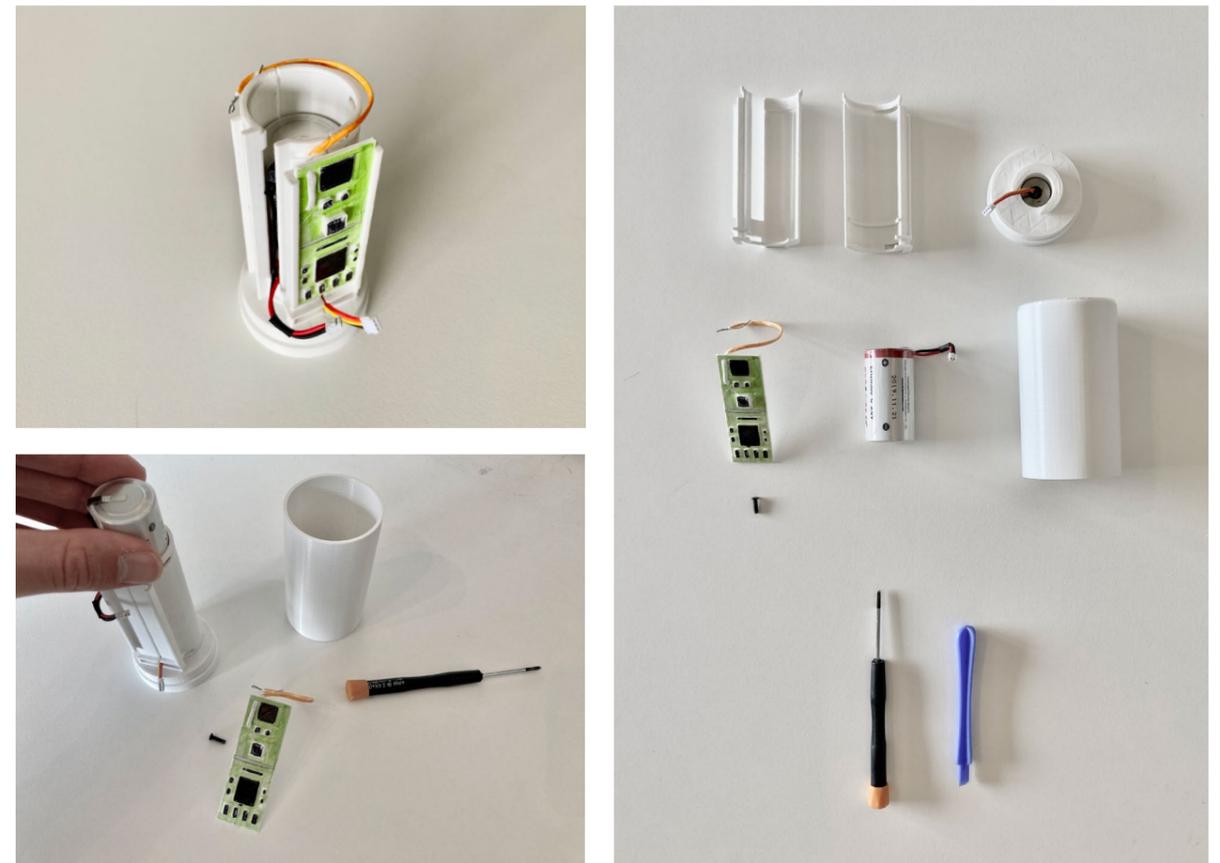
(Clockwise, starting top left) assembled prototype; disassembly of battery, full disassembly
